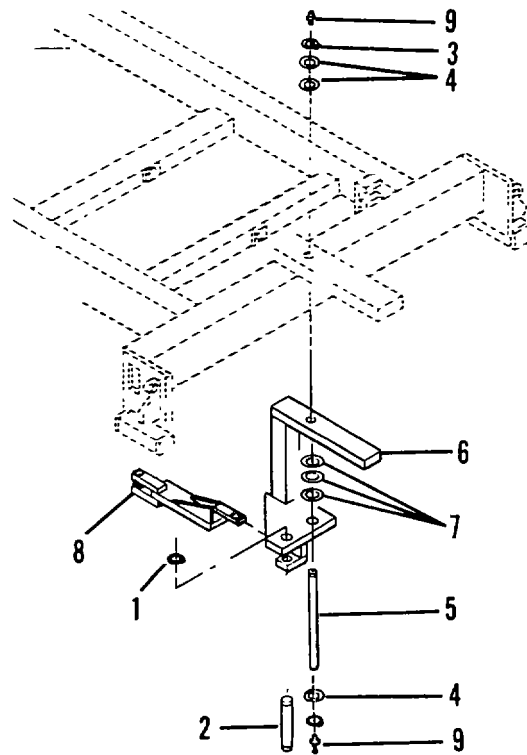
Towing Assembly (Sheet 2 of 2).
